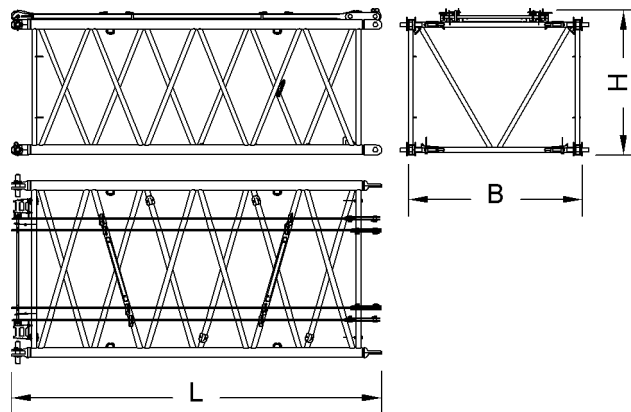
2821 boom section dimensions 20 ft for LR1300/LR1300W
